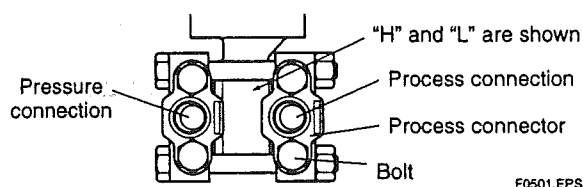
"H" and "L" Symbols on a Capsule Assembly
